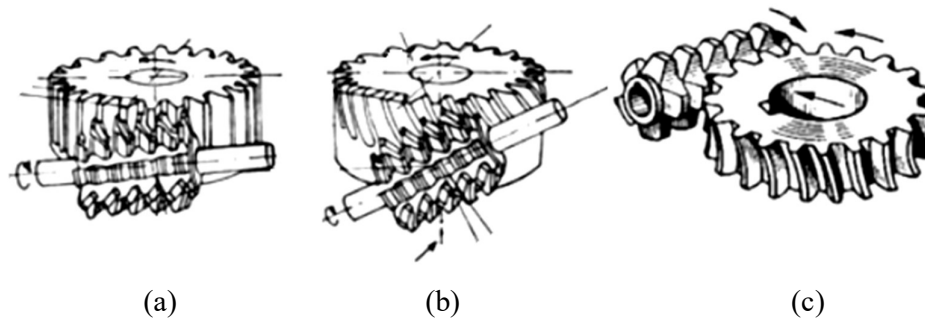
Gear generation by hobbing (a) straight tooth (b) helical tooth (c) worm wheel
